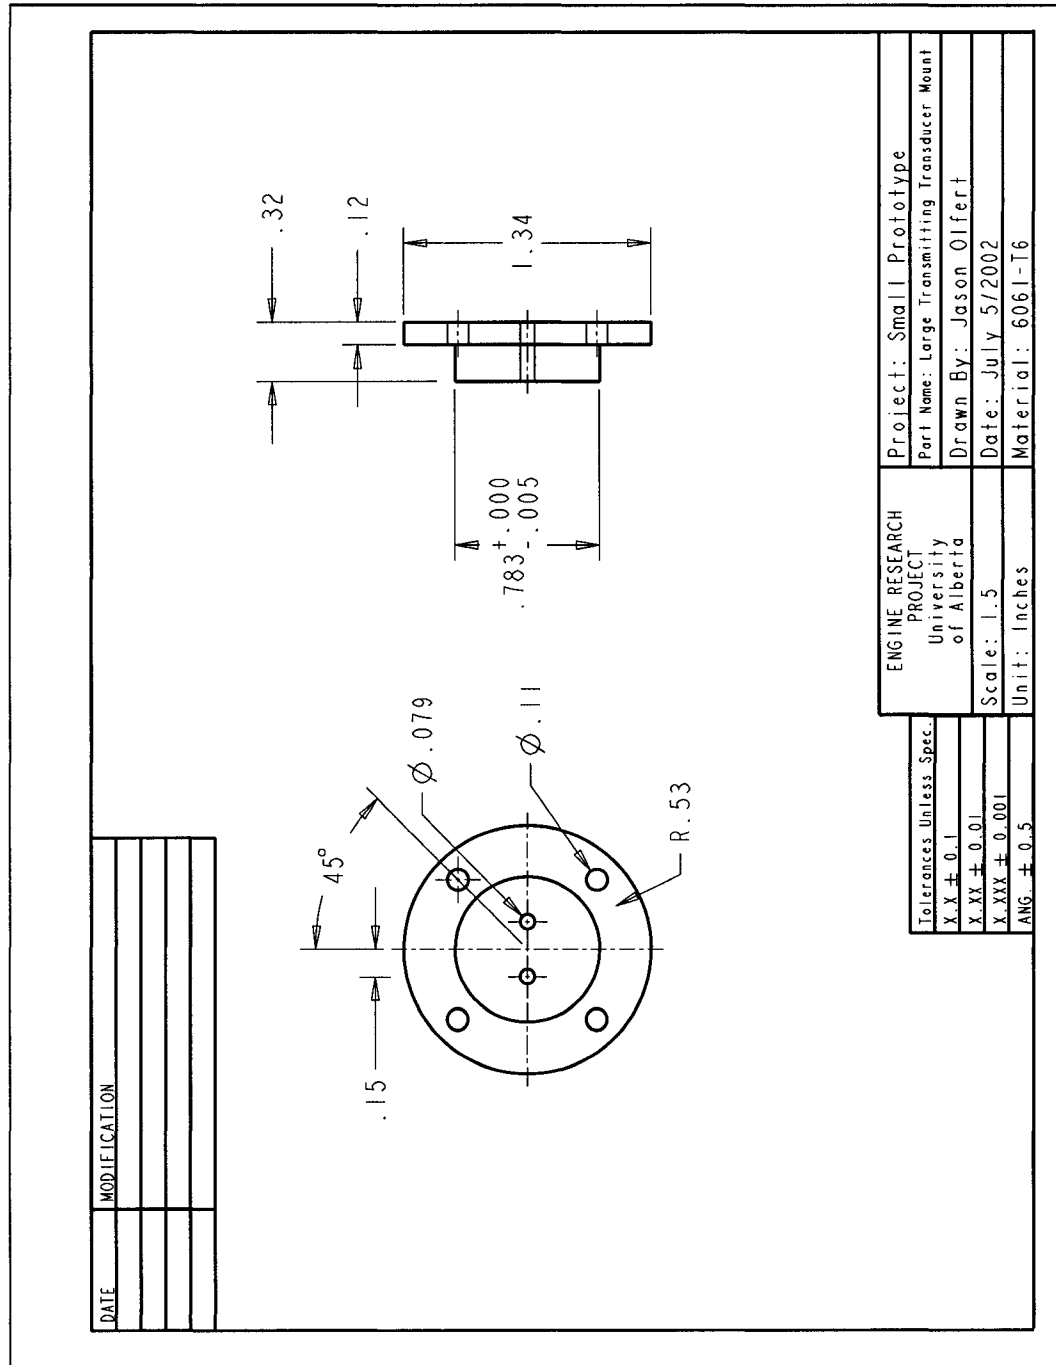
Drawing of Large Transmitting Transducer Mount of Small Prototype
